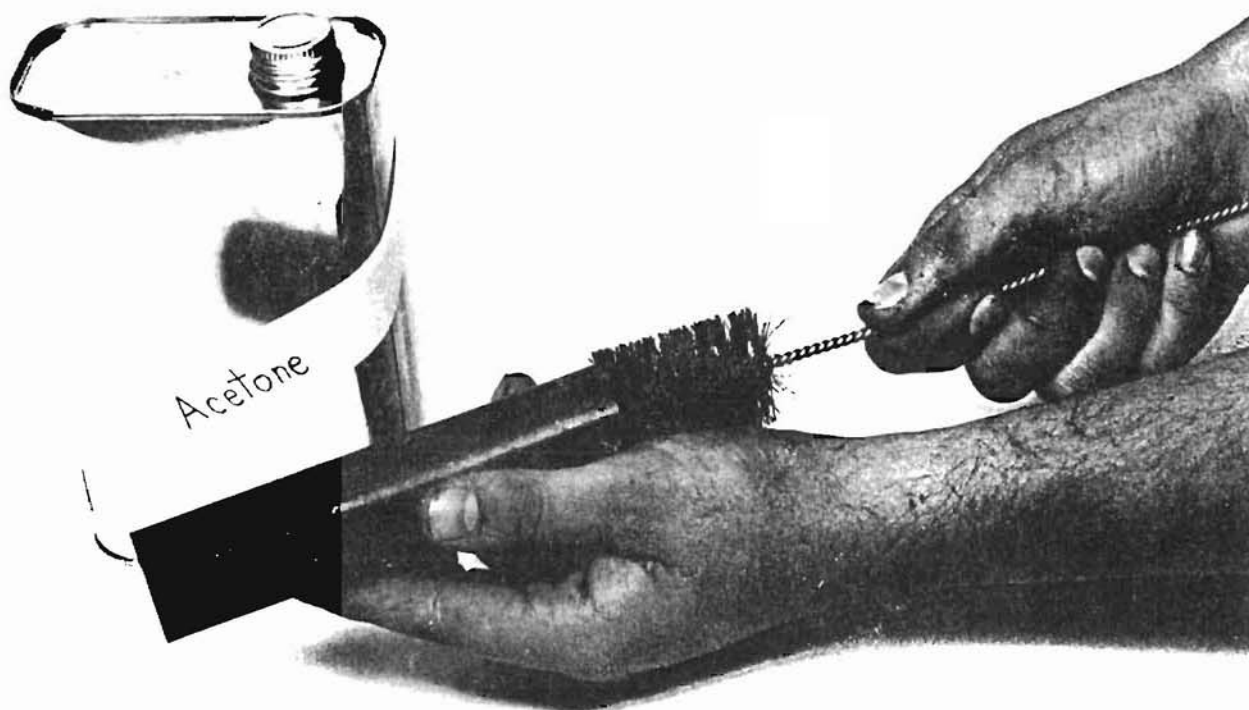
Cleaning the inside surface of a steel tube to insure good Flexane adhesion.
